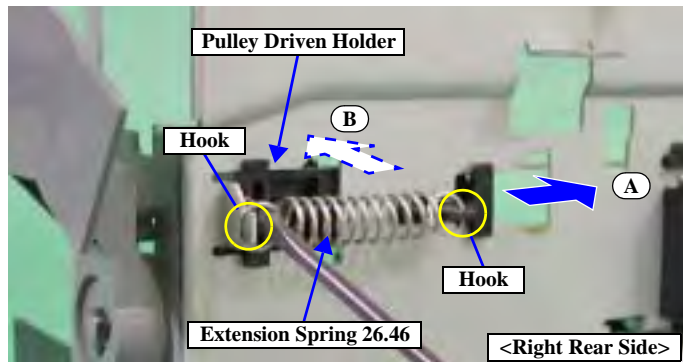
CR Guide Shaft/Carriage Unit Removal 1
